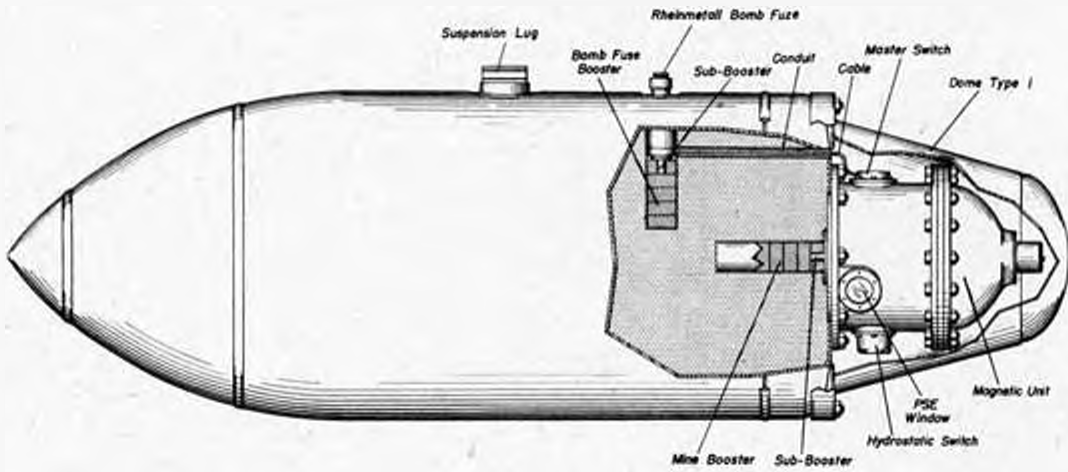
Mine Type GG fitted with Magnetic Unit, Sectional View
